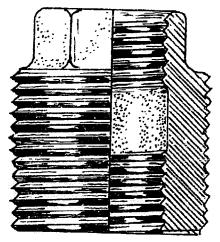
Galvanized Pipe Double Tap Reducing Bushing 2" to 1"
